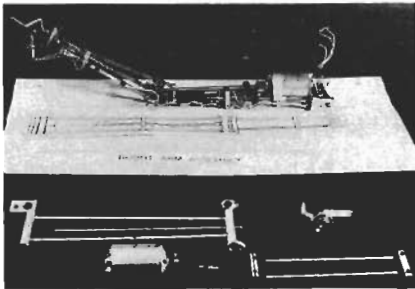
MANIPULATOR ASSEMBLY. Finished unit and separate pieces are facing opposite ways.
